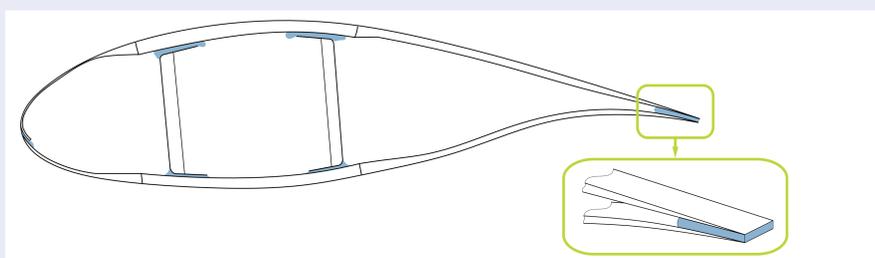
Cross-section of a wind turbine blade structure with detail of the trailing edge adhesive joint
